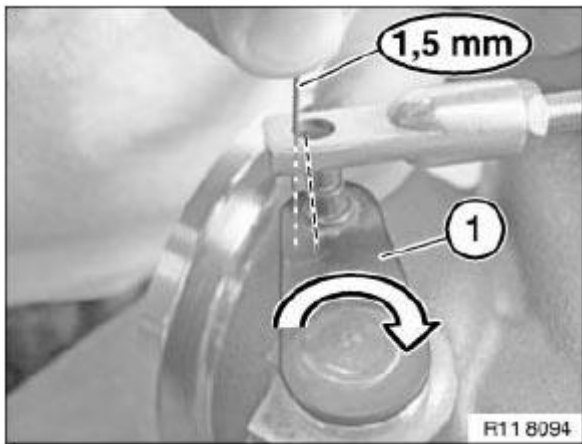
Checking Wastegate Valve Gap Dimension (2 Of 2)
